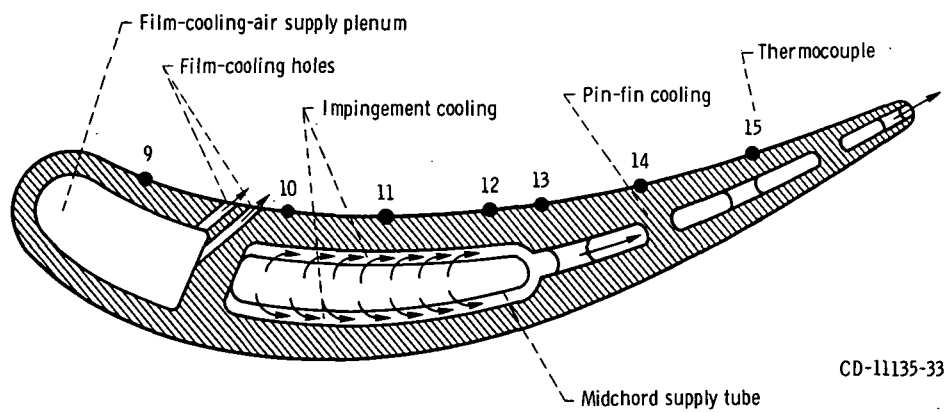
Cross-sectional midspan view showing internal cooling scheme and thermocouple locations.
